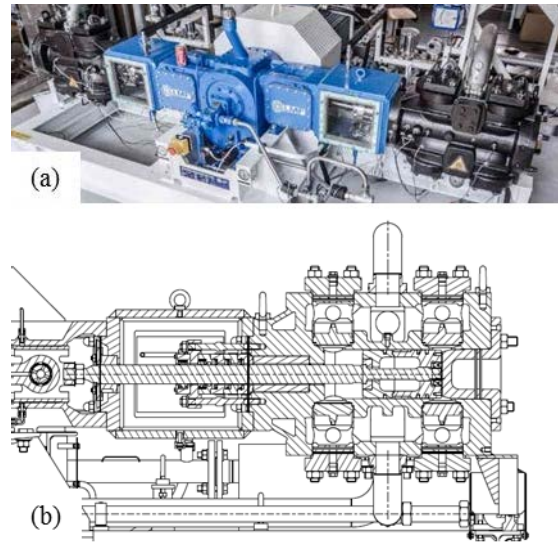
Photograph (a) and sectional view (b) of the test compressor
